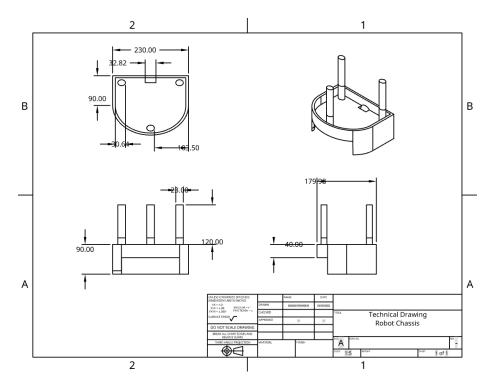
The technical drawing for the robot chassis detailing its measurements.
